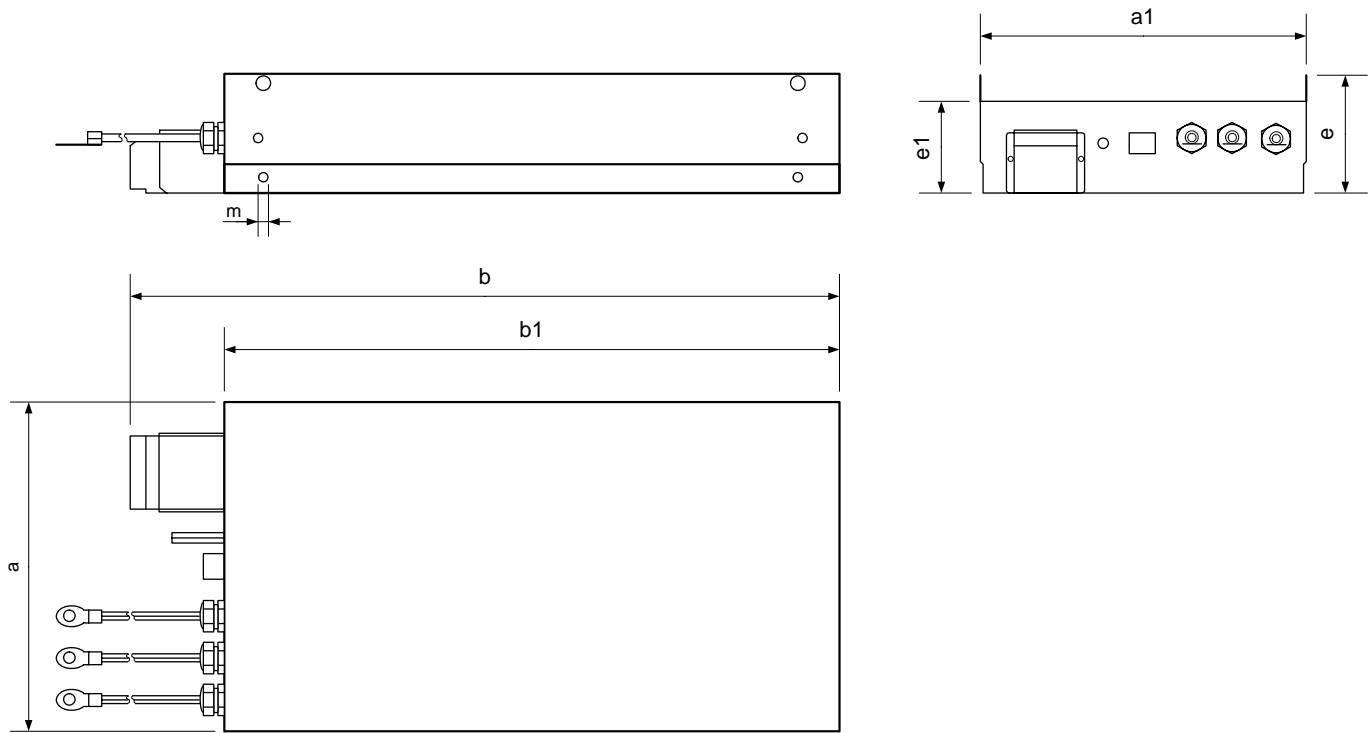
Dimension drawing, mains filter, frame size 3
